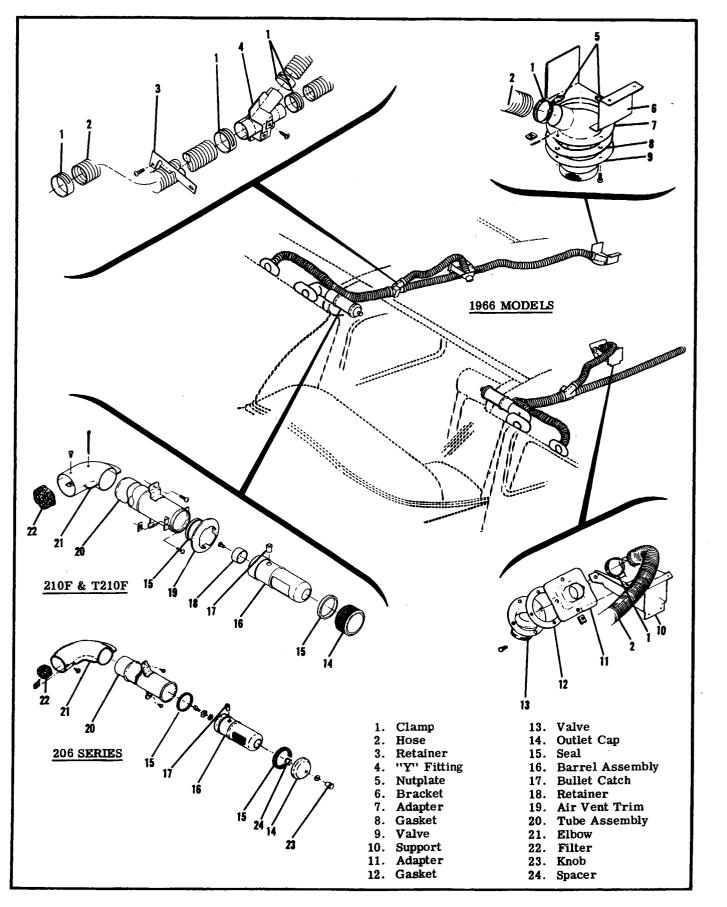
Overhead Ventilating System (Sheet 1 of 2)
